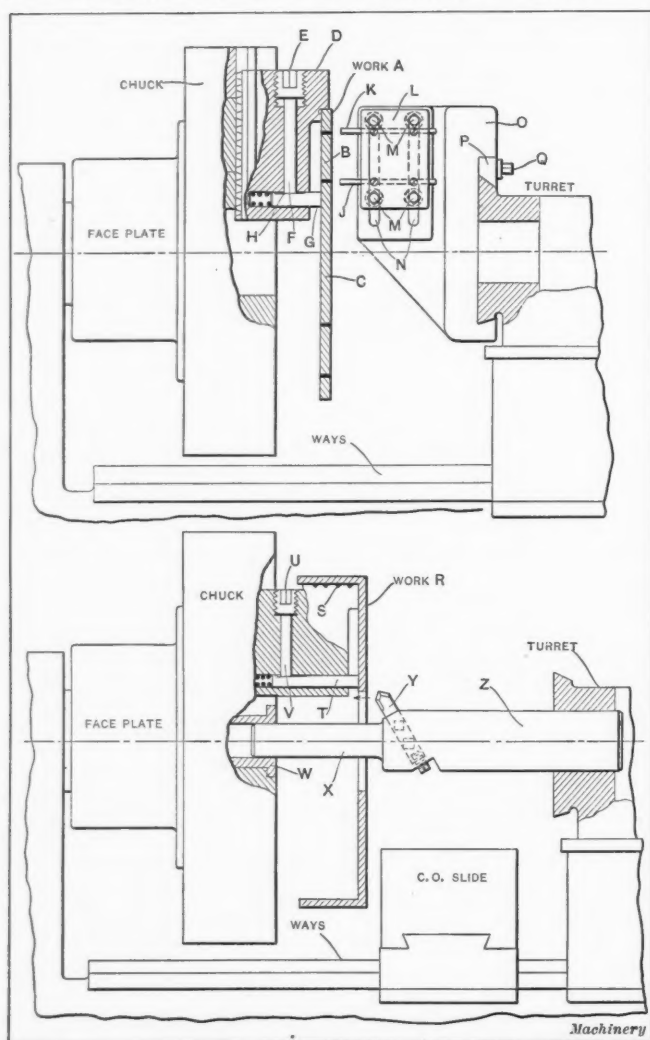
Cutting out a Thin Sheet Steel Collar and turning, boring and facing a Thin Steel Drum
